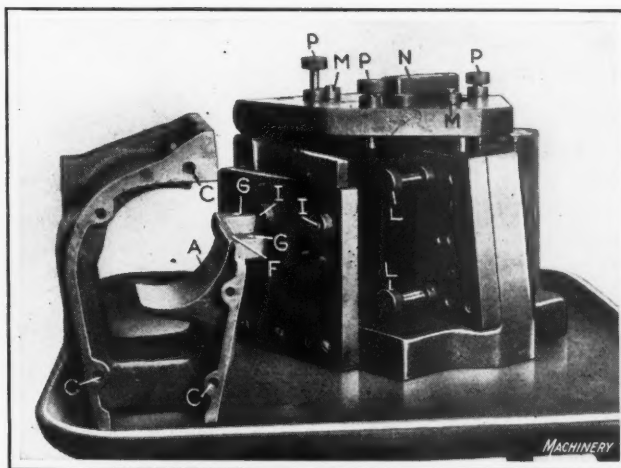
Box Type Gaging Fixture for Motor Generator Frame
